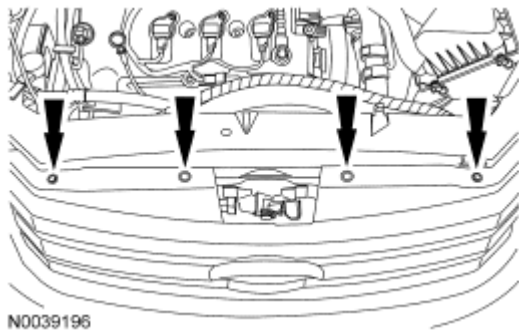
Locating Pin-Type Retainers From Top Of Radiator Grille Bolts
